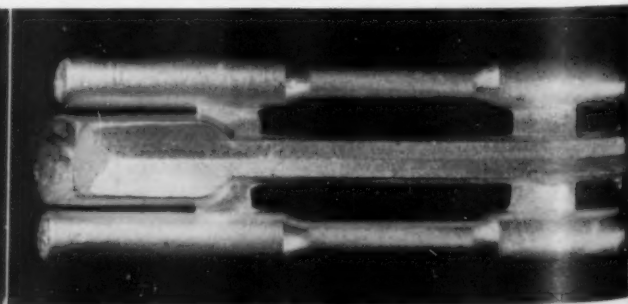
A casting after extra mold coating was added to wedge gates of the mold.
